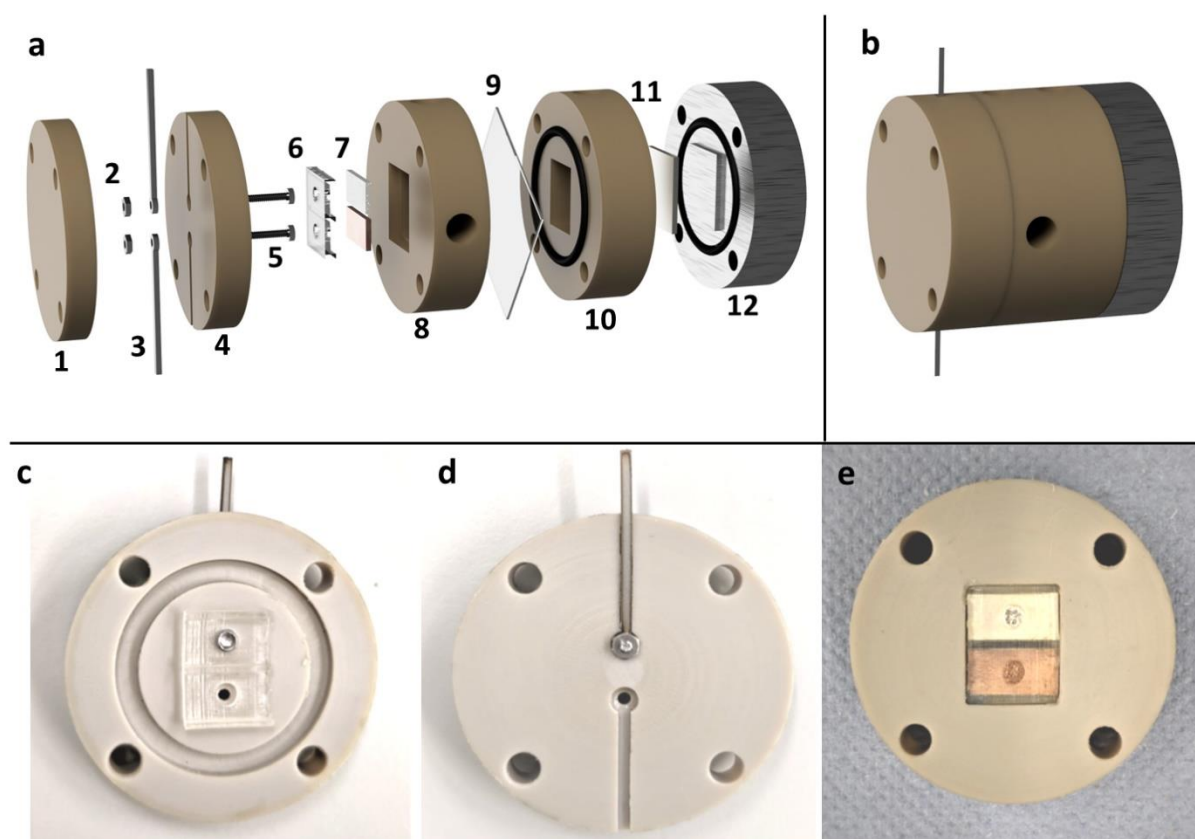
a) Exploded view of the electrochemical cell - (1) Endplate cathode back (2) Connection nuts (3) Connection rods (4) Endplate cathode front (5) Connection bolts (6) Electrode holder (made from Flexible 80A resin, Formlabs) (7) Cathodes (8) Catholyte chamber (9) Membrane (10) Anolyte chamber (11) Anode (12) Conductive endplate, b) Closed electrochemical cell, c) Front of the cathode endplate including the electrode holder connected at the top connection, d) Back of the cathode endplate fitted with the connection rod at the top side, e) Catholyte chamber fitted with the electrodes and electrode holder.
